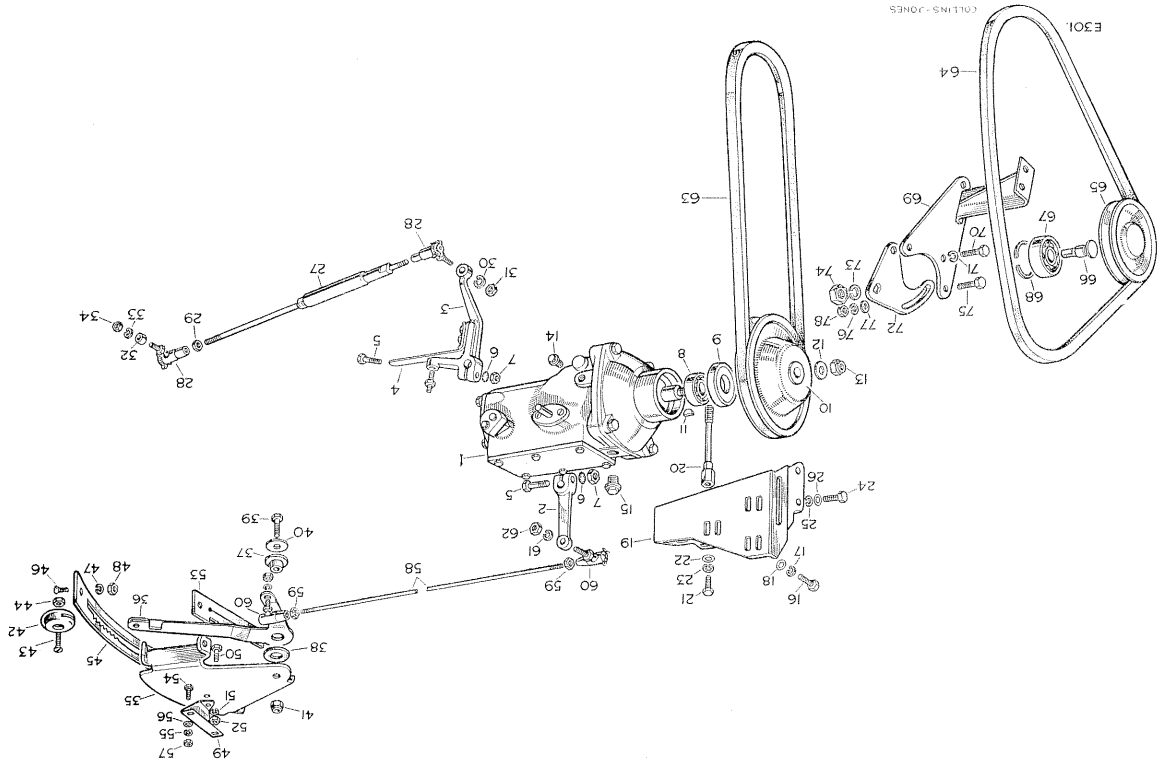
Layout of engine governor—2 1/2 litre Petrol
